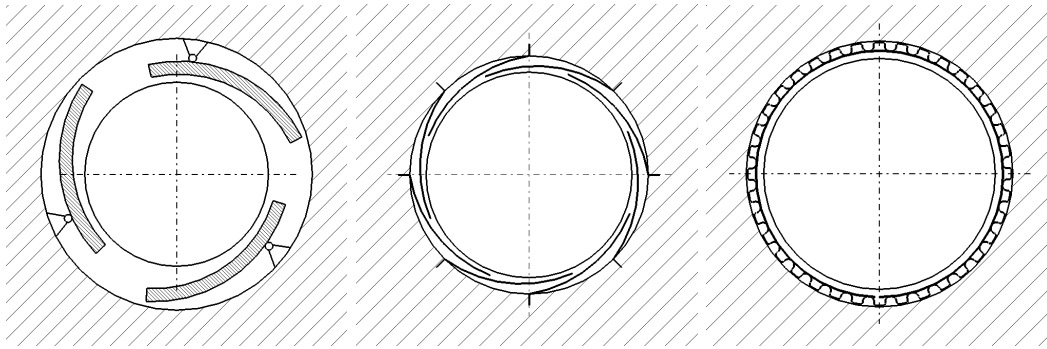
a) Tilting Pad Bearing, b) Multileaf Bearing, c) Bump Foil Bearing
